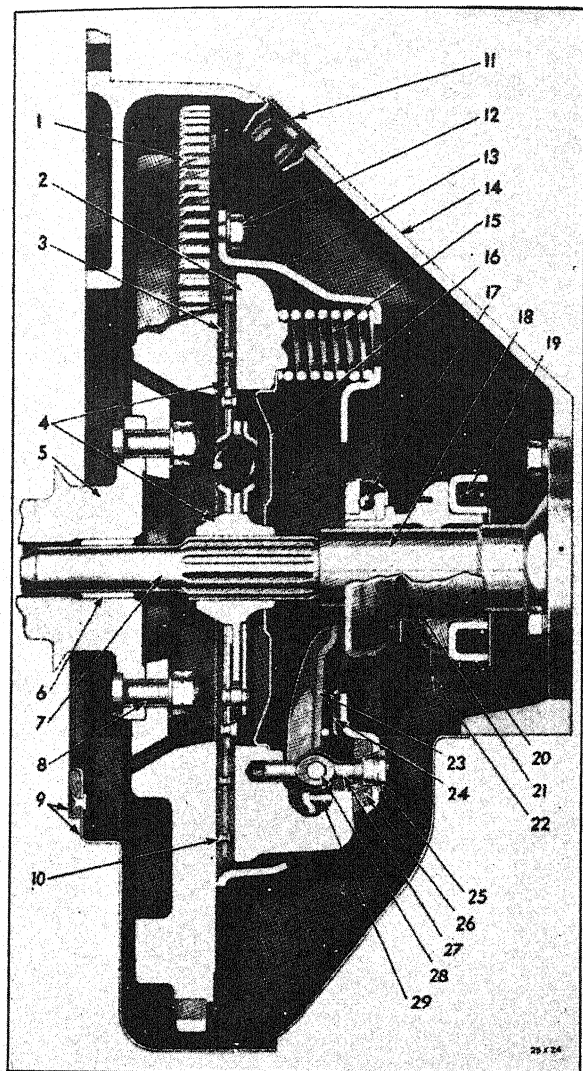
Spring-pressure clutch. 1—Flywheel and ring gear. 2—Pressure plate. 3—Disk facing. 4—Disk assembly. 5—Engine crank shaft. 6—Crank shaft bushing (transmission-drive, pinion-pilot bushing). 7—Transmission-drive pinion. 8—Flywheel bolt. 9—Housing pan and seal. 10—Disk-facing rivet. 11—Housing ventilator screen—small. 12—Cover to flywheel screw and lockwasher. 13—Cover. 14—Housing. 15—Pressure spring. 16—Pressure plate baffle. 17—Release bearing. 18—Transmission-drive, pinion-bearing retainer. 19—Release-bearing pull-back spring. 20—Release fork. 21—Release-bearing sleeve. 22—Clutch housing ventilator. 23—Release lever. 24—Release-lever spring. 25—Release-lever eye-bolt nut. 26—Pressure-plate, driving-lug grease pad. 27—Release-lever eye bolt. 28—Release-lever pin. 29—Release-lever strut.
